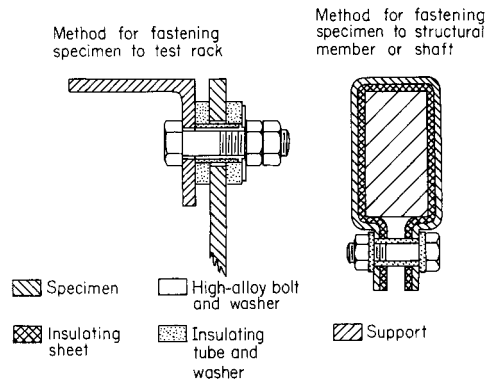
Methods for attaching specimens to test racks and to parts of moving equipment. (Mantell, ed., Engineering Materials Handbook, McGraw-Hill, New York, 1958.)
